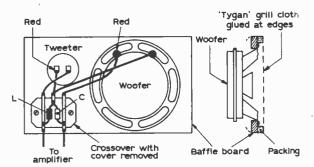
Mounting and wiring of the speakers on the baffle board.
